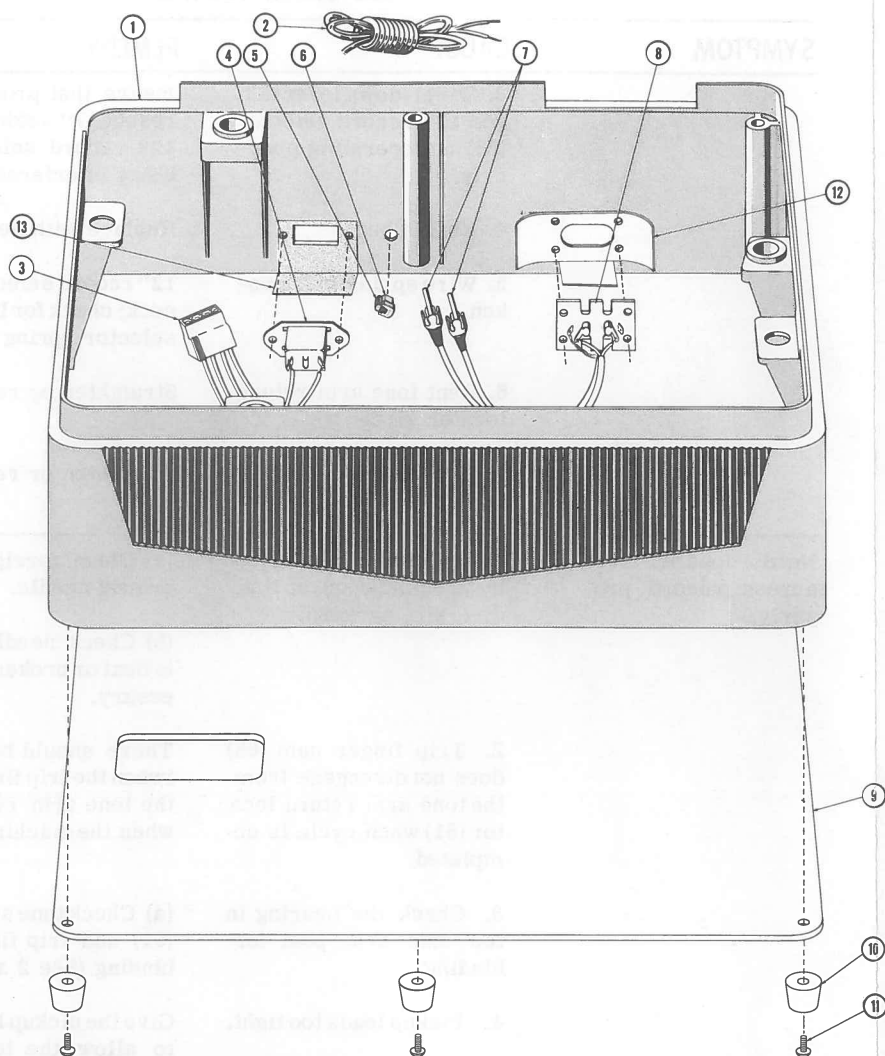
Exploded View of Pan Used in Models 1586 and 1587.
